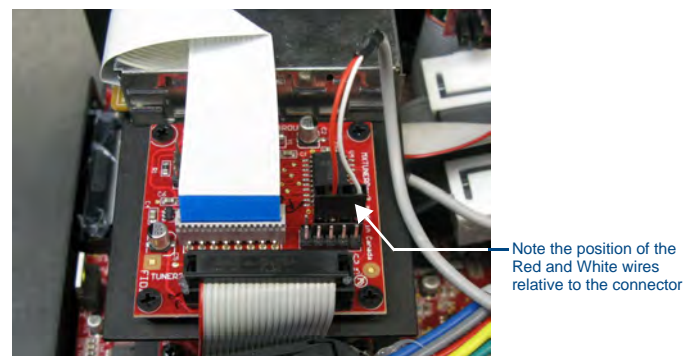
Audio Controller - 2-wire end of cable connected to the tuner assembly.
